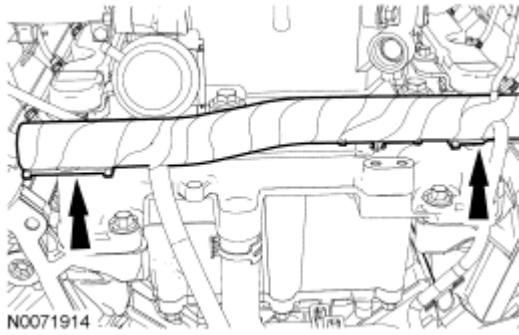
Locating Wiring Harness Pin-Type Retainers
